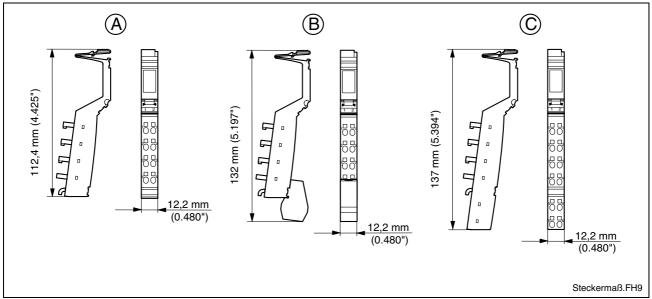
Dimensions of the electronic sockets (8-slot housing)
